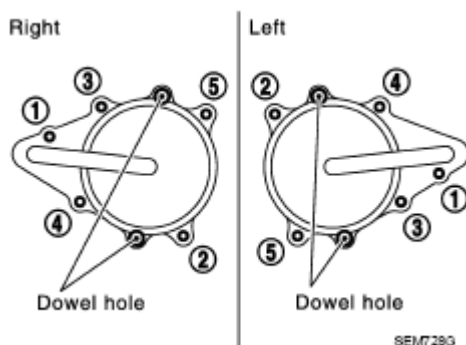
Identifying Dowel Pins On Chain Case With Holes
